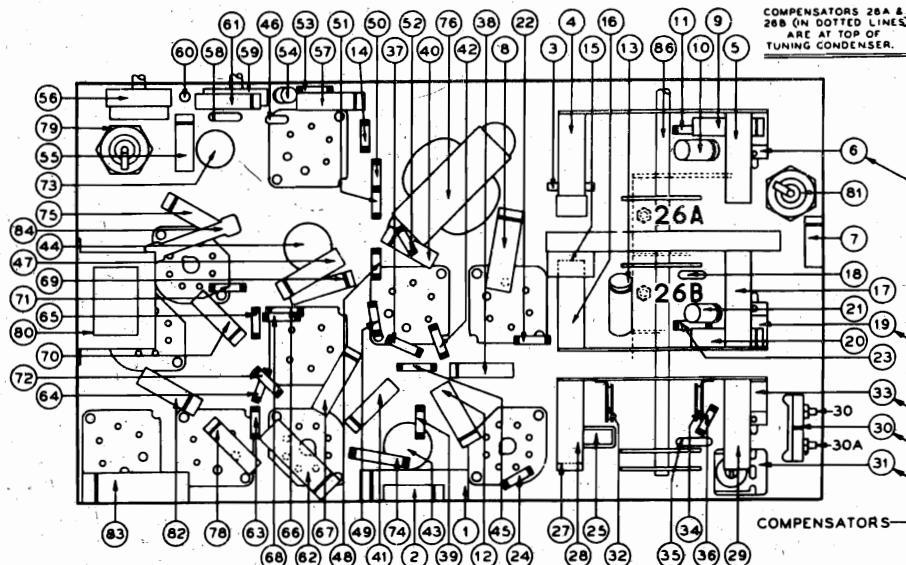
Part Locations, Model 39-751, Underside of Chassis
